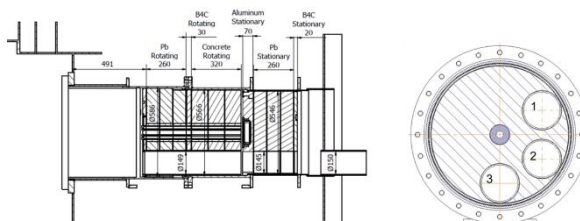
Left: beam shutter side view. Right: front view of the revolving part with 3 openings.
